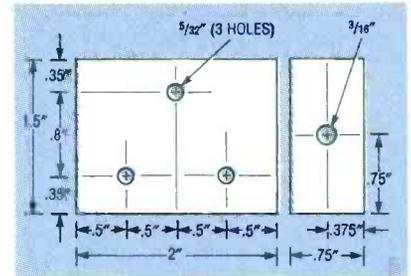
TAIL MOUNTING BLOCK. The wind vane tail mounts on a wood block.
